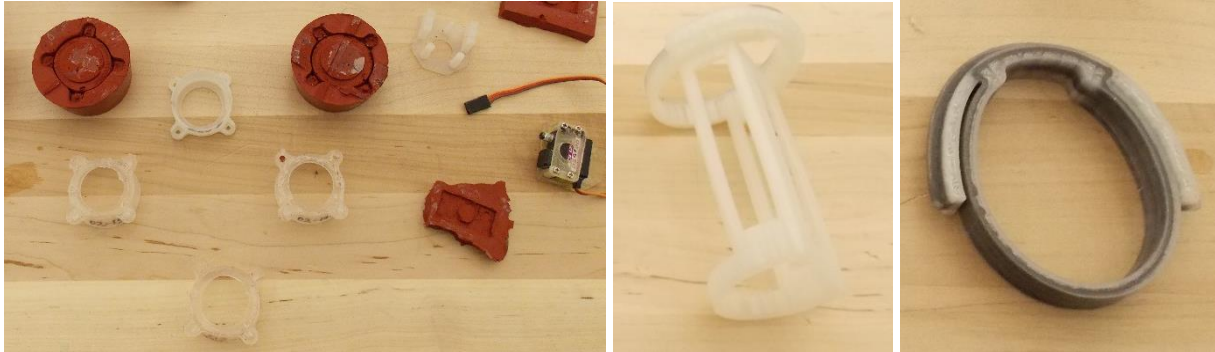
Motor mount and tools (left); avionics shelf (center); ring stiffener (right)
